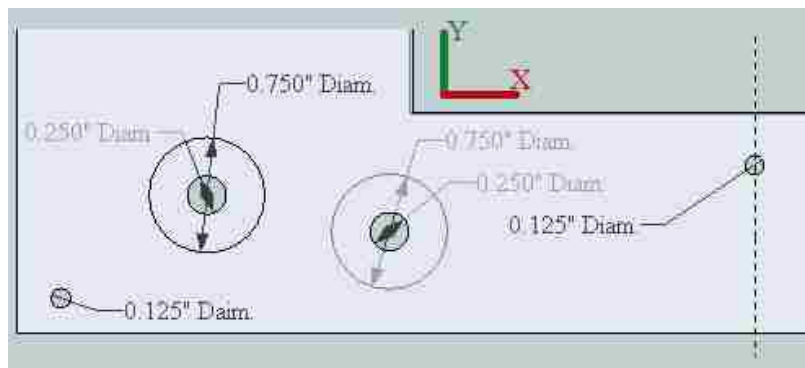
Top view of the 10x10 cm² upper trimmer aluminum plate illustrating hole dimensions.
